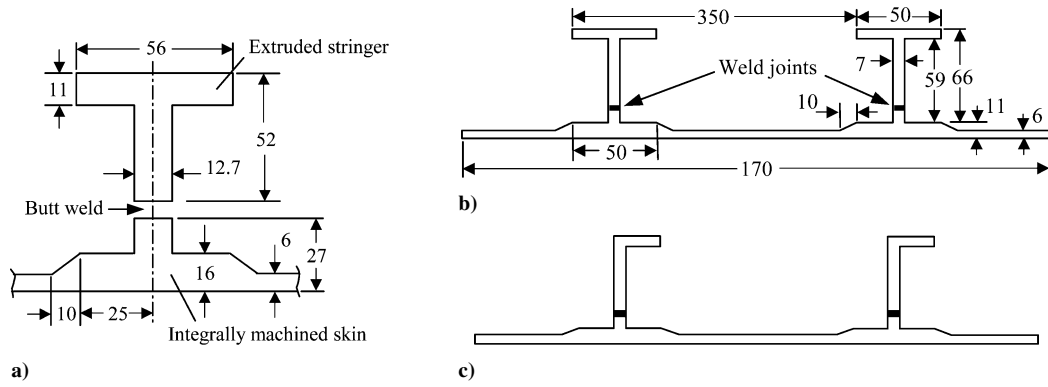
Two-stringer panels fabricated by VPPA welding process: a) dimensions before welding, b) tension panel representing wing lower cover ( $A_{st}/bt = 1.03$ ), and c) compression panel representing wing upper cover ( $A_{st}/bt = 0.87$ ) (all dimensions in millimeters).
